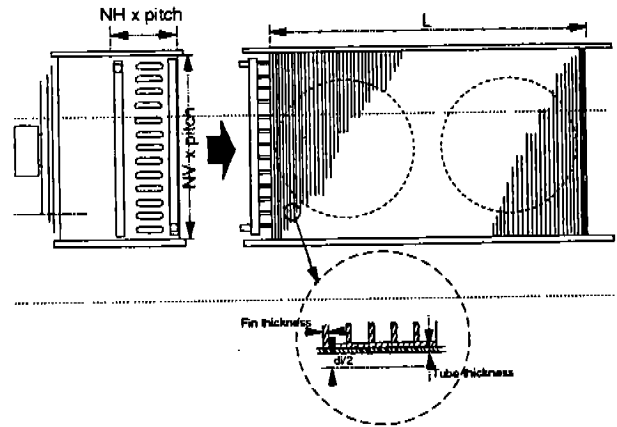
Schematic drawing of a fin-tube air cooler.
